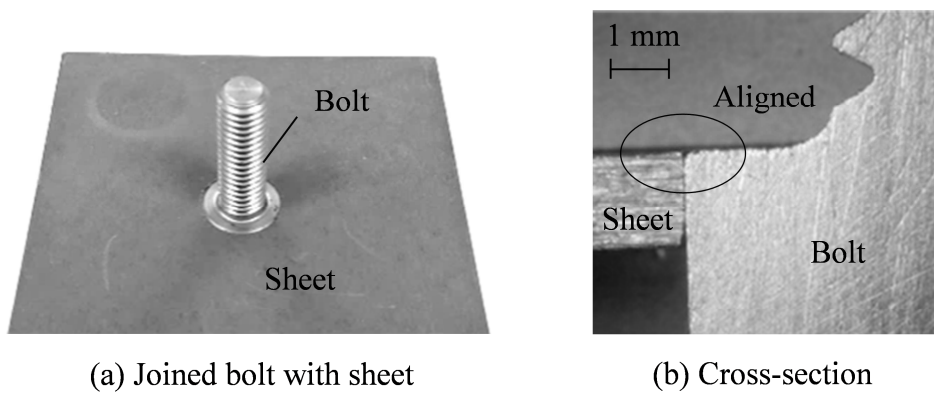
Die-quenched steel sheet joined with bolt.
